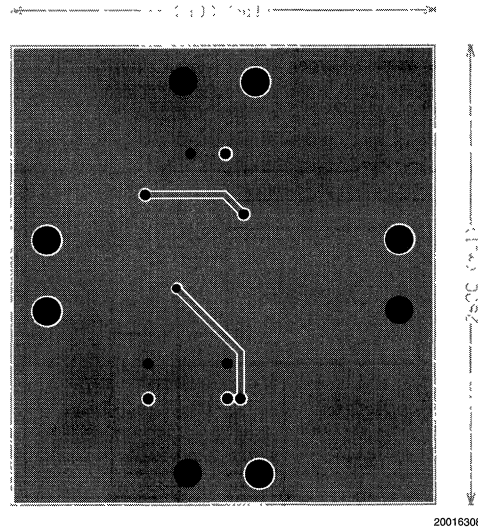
LM3477 Evaluation Board PCB Layout (Bottom Side)
